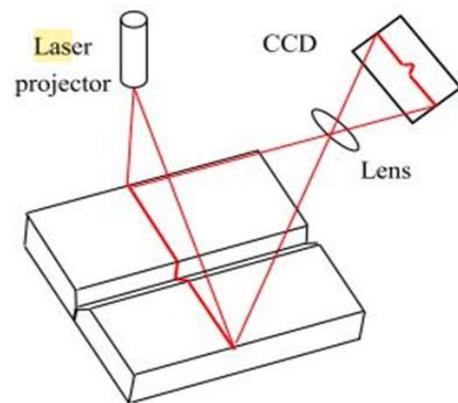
Location Identification of Single-V groove Butt Joint by Laser Projectors and Camera [36].
